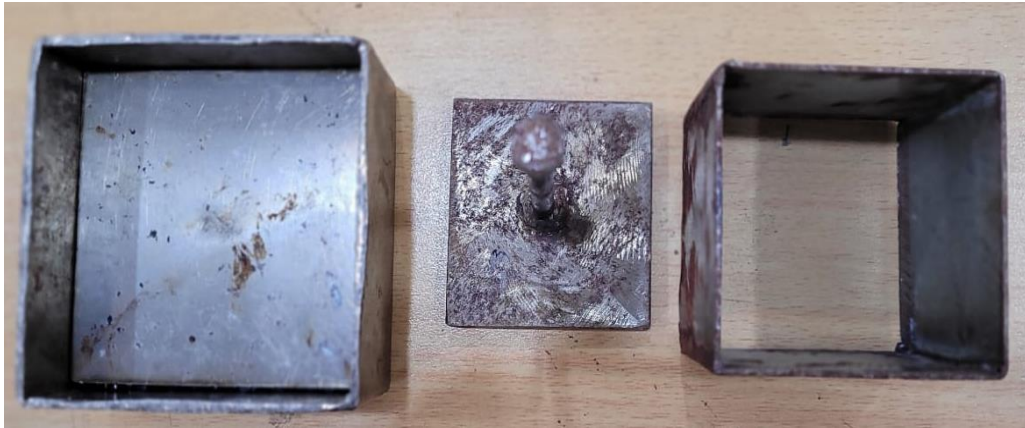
Custom-made mould design used for the fabrication of plastile
